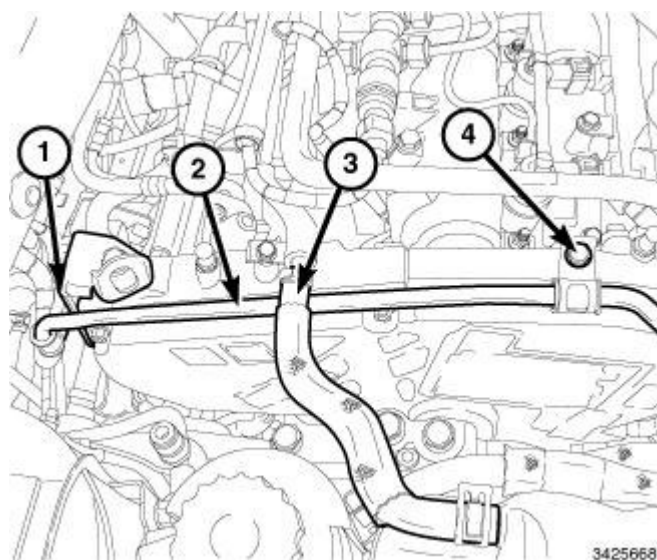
Power Steering Pressure Line, Hose & Fasteners
